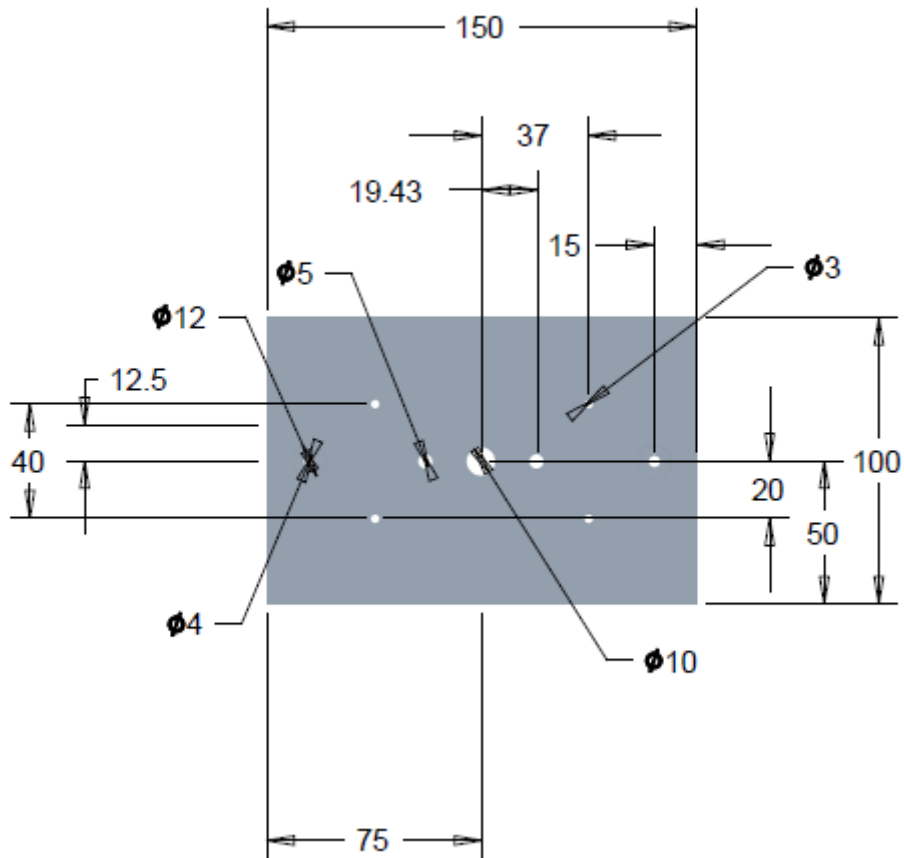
Z-axis mechanism Base Plate CAD Model(mm)
